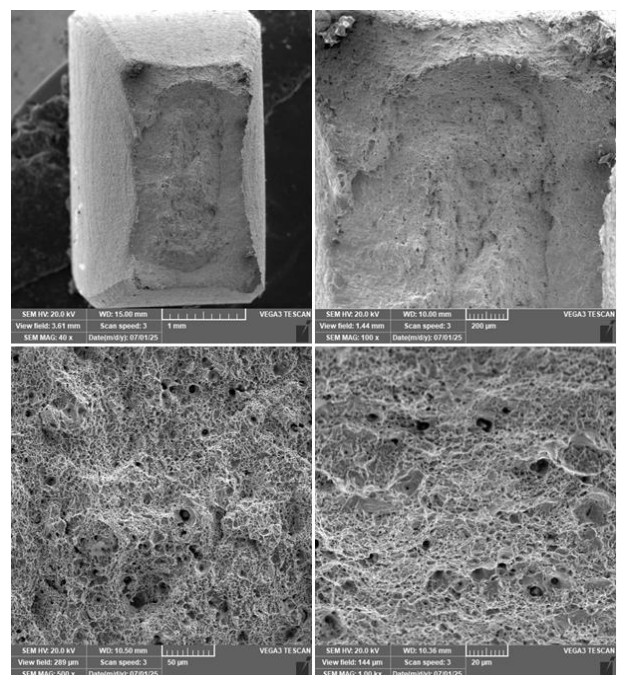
Fracture surface of the "CSN 12022 initial state" sample
